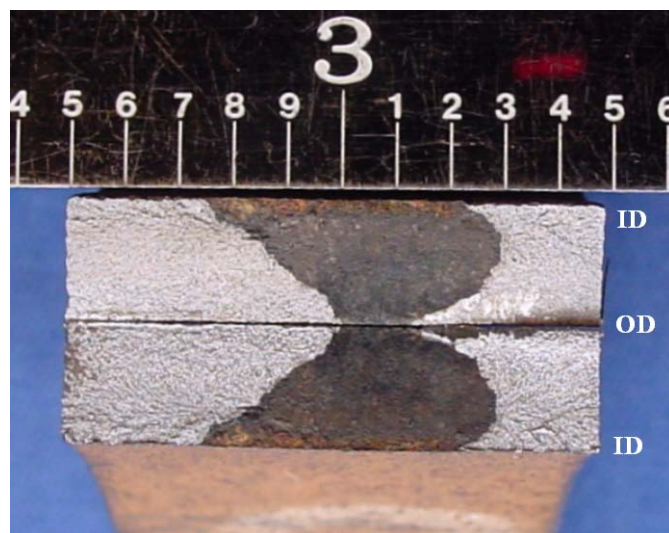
Appearance of a "Penetrator" on a Surface Broken after Chilling (HF-ERW Pipe)
